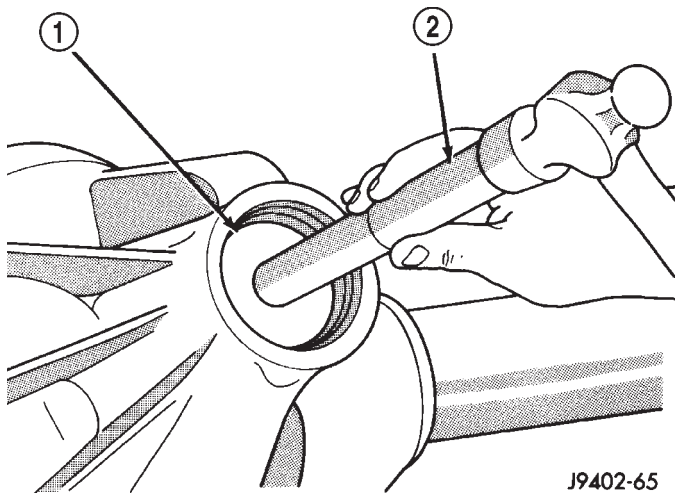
Pinion Front Bearing Cup Installation J9402-65
